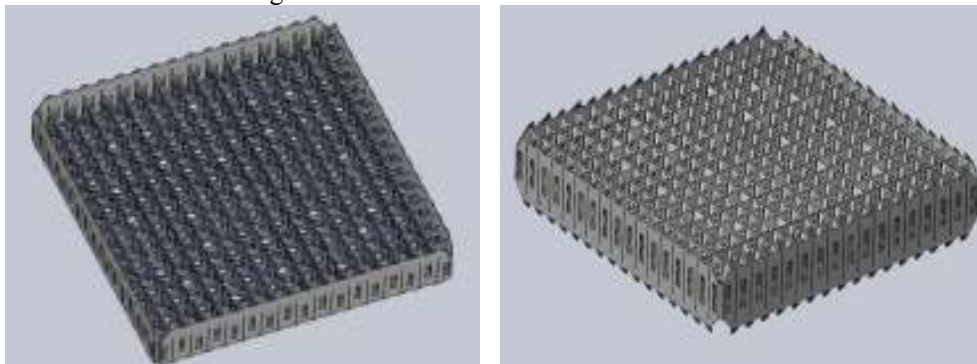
Solid model of the P-Grid (left) and Bottom Grid (right)
